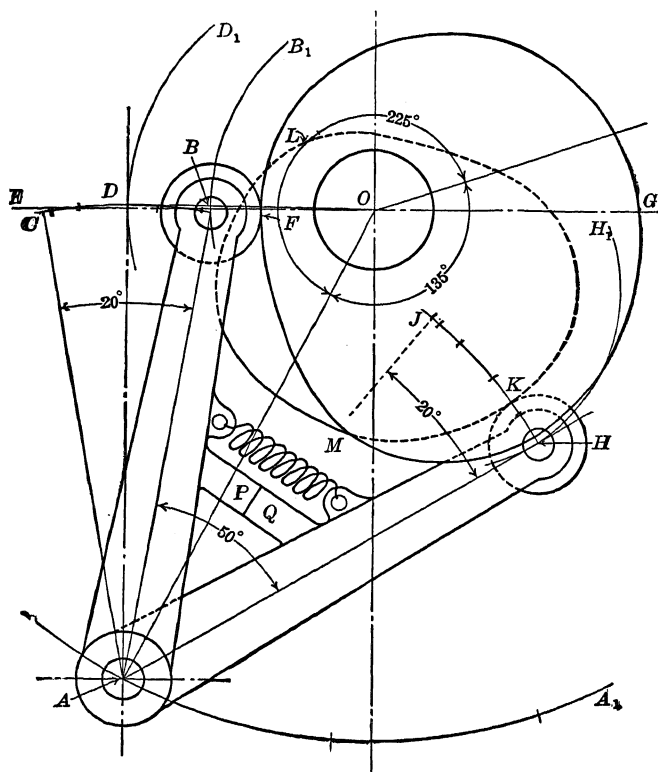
OSCILLATING POSITIVE DRIVE DOUBLE DISK CAM
